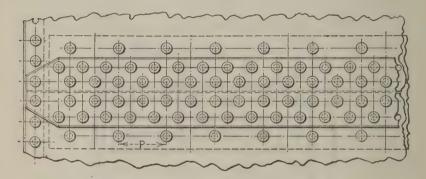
EXAMPLE OF BUTT AND DOUBLE STRAP JOINT, TRIPLE-RIVETED
